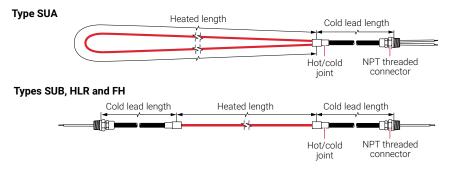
Configurations for surface mount or directly embedded in concrete installations
